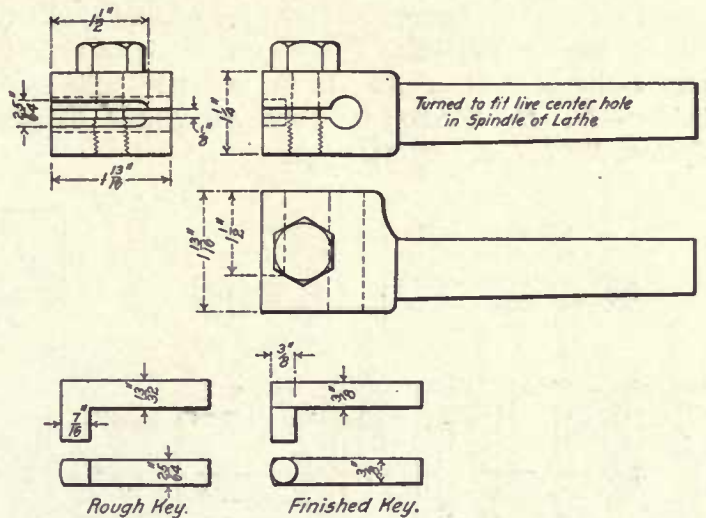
Chuck for Turning Knuckle-Joint Keys.
